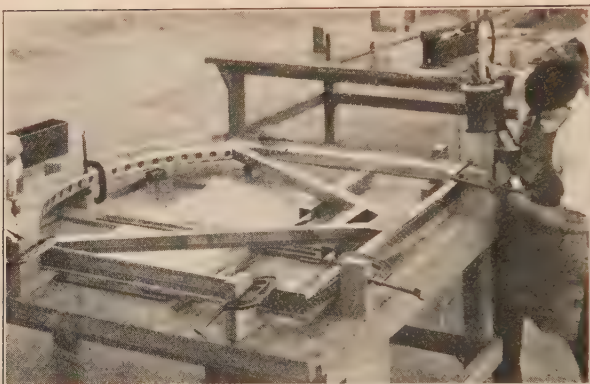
Frame or bulkhead assembly of Ford plane.
